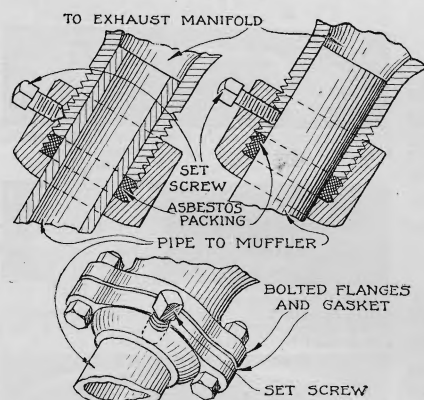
Set screw in exhaust pipe manifold union holds it tight and stops escape of gas.
